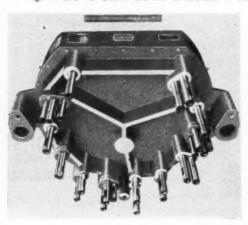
illustrates one arrangement of drillhead, suspended bushing plate, and fixture which was used for drilling a worm gear case and cover shown and also to tap the case by putting tap holders in the spindles and removing the drill bushings from the bushing plate. Several tapping heads and fixtures are shown in figure 9. These heads were attached to a flanged quill type of machine which also had a lead screw, and the gear ratio of the heads was made so that they all operated with a ten thread lead screw on the tapping machine, therefore it was never necessary to change the lead screw of the machine.
